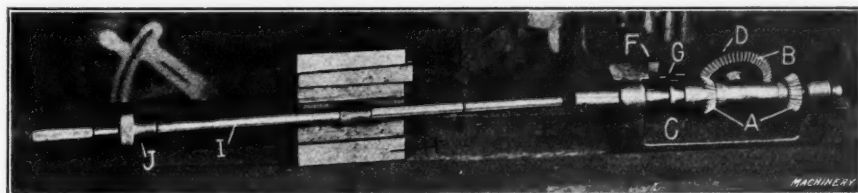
Fixture used in testing Alignment of Cross-slide Screw and Gage for testing Apron Shifter Gears
